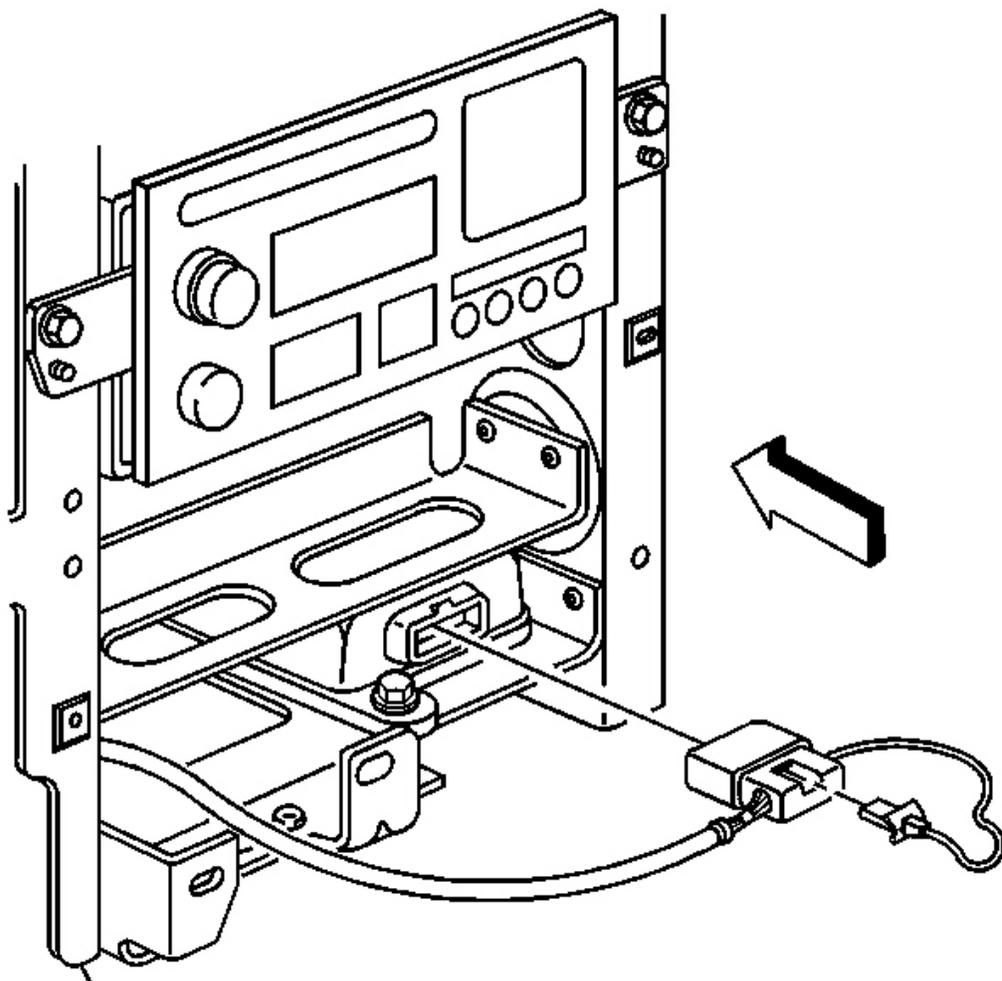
I/P Center Support System, SDM & Mounting Fasteners
